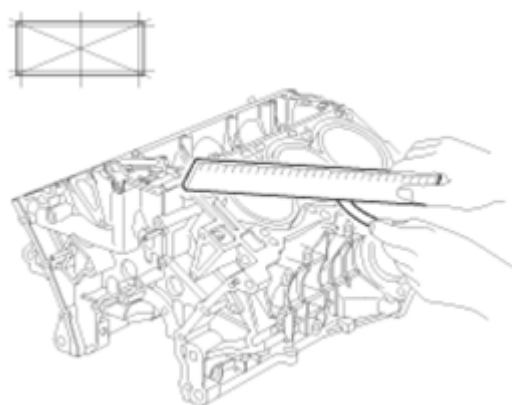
Measuring Cylinder Head Gasket Surface Using Precision Straight Edge And Feeler Gauge
